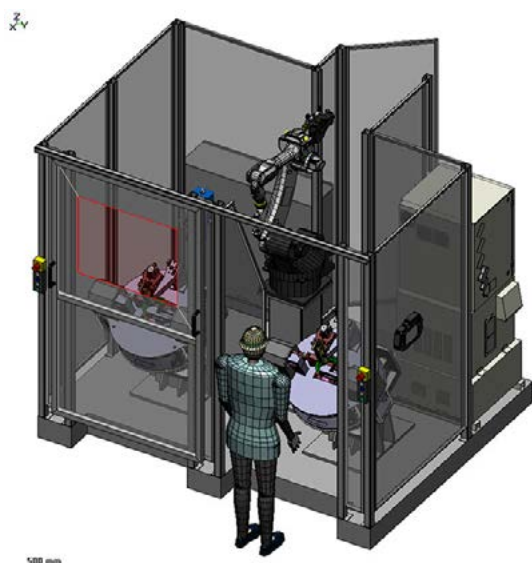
Robotic stand for welding front shock absorbers
